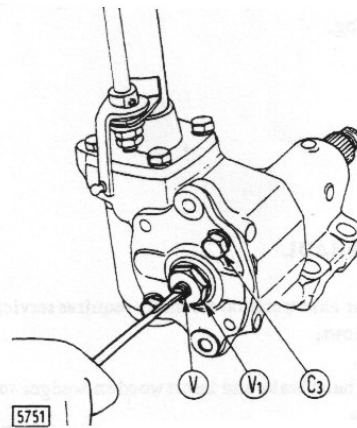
Adjusting worm-and-nut setting. (C3) Side cover cap screws. (V) Adjusting screw. (V1) Adjusting screw (V) nut.
